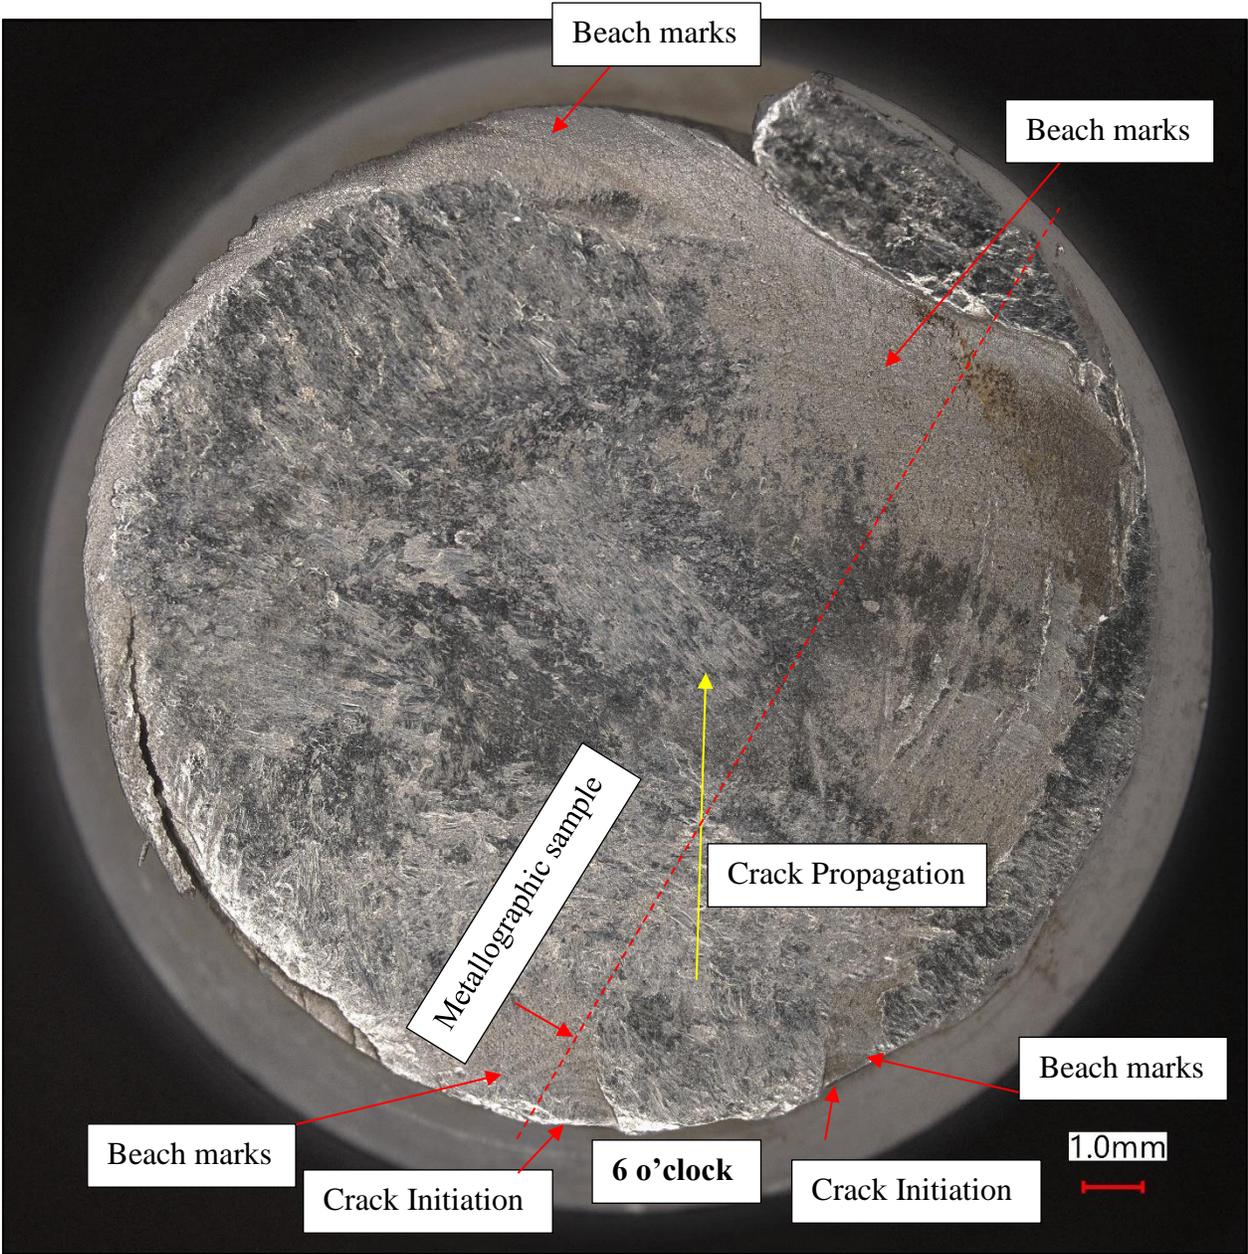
FRACTURE SURFACE, BOLT C2
